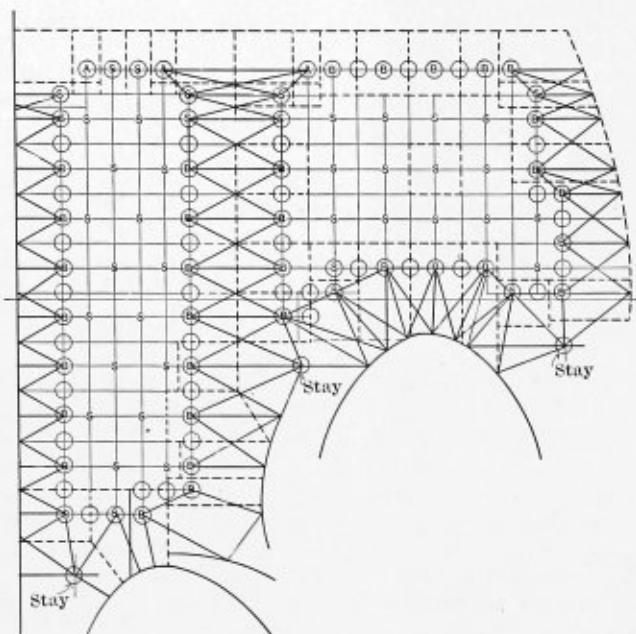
DIAGRAM SHOWING SPACES TO SUPPORT ON FRONT TUBE PLATE AND BACK TUBE PLATE. DOTTED SQUARES SHOW TUBE SURFACES. FULL SQUARES SHOW PLATE SURFACES.
